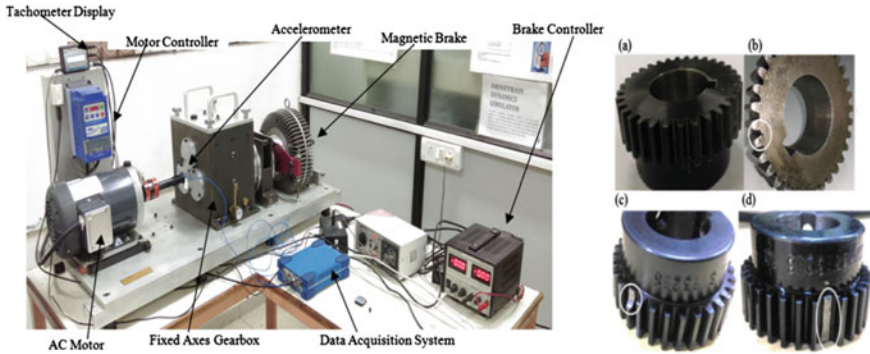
Experimental setup and different gears, a Healthy gear; b cracked tooth gear; c chipped tooth; d missing tooth gear
